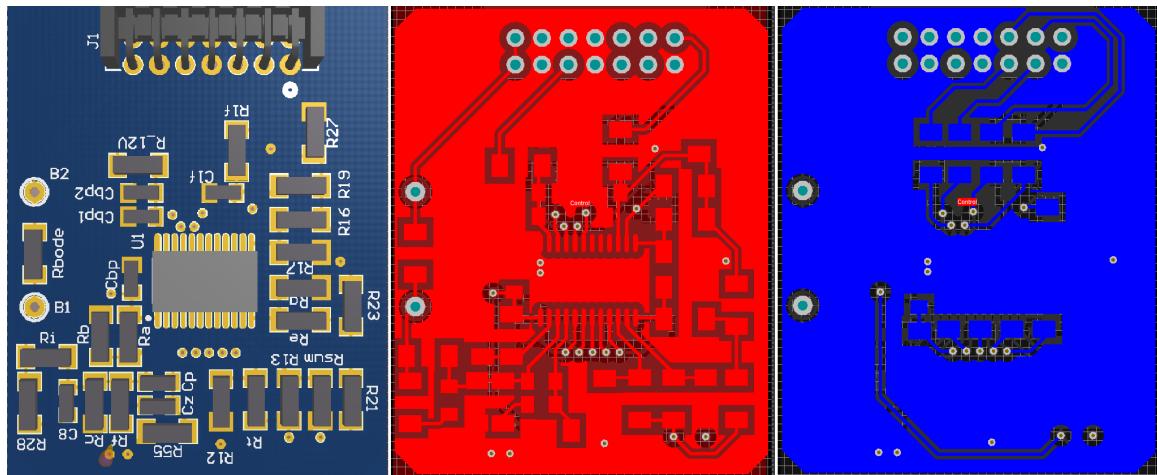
Control PCB layout on Altium Designer (3D, top, bottom)
